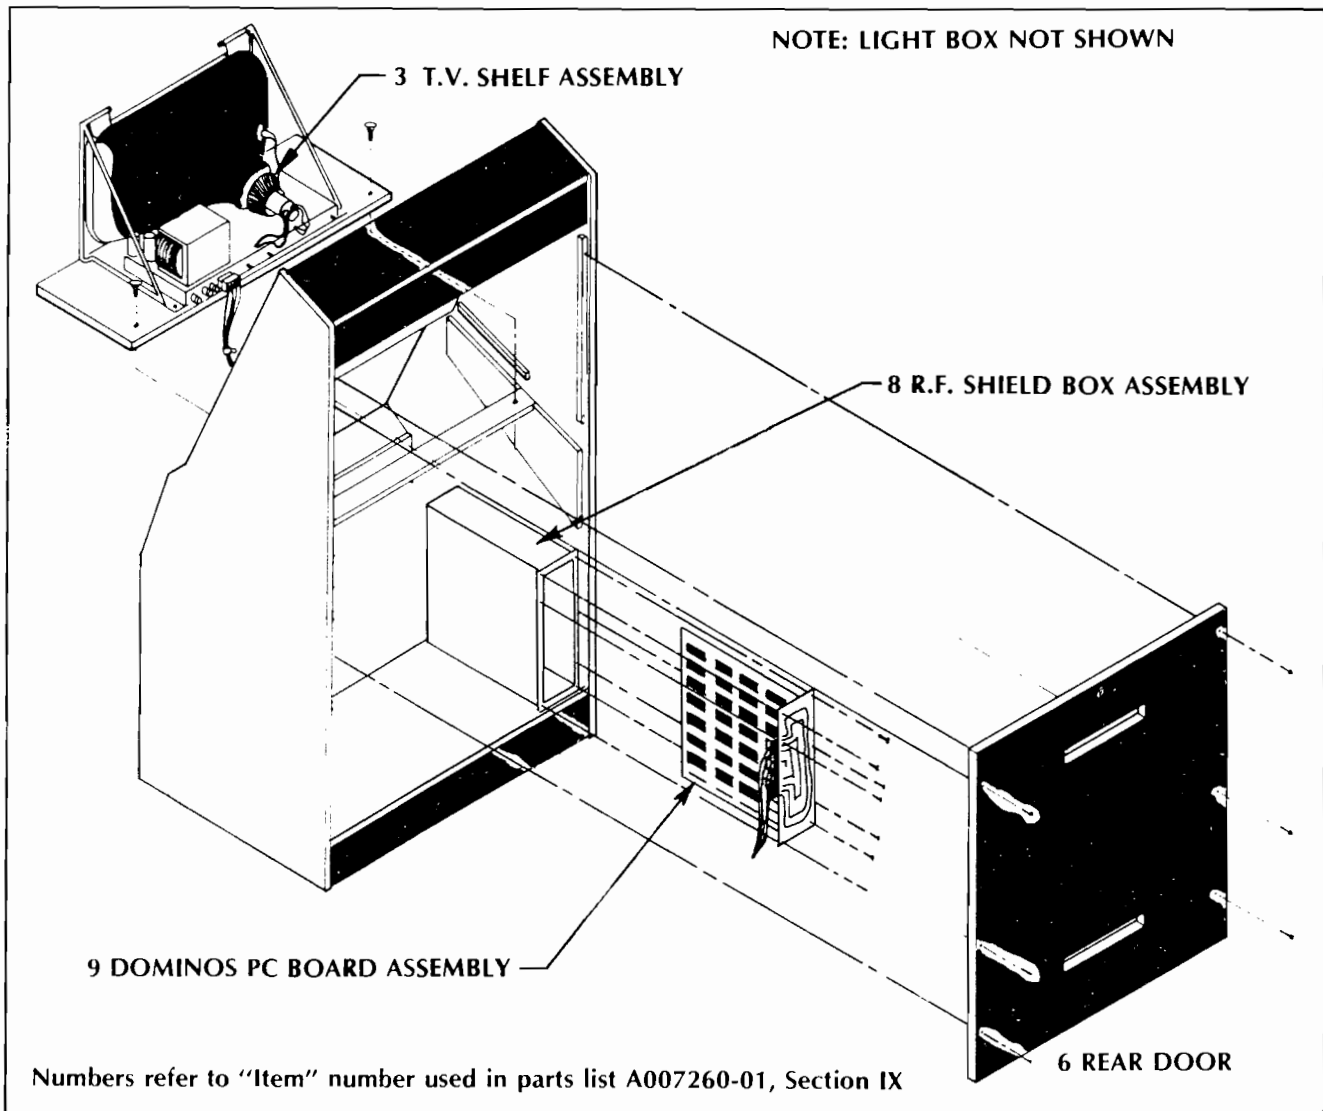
B Exploded Diagram, Rear View (Upright Model Only)
